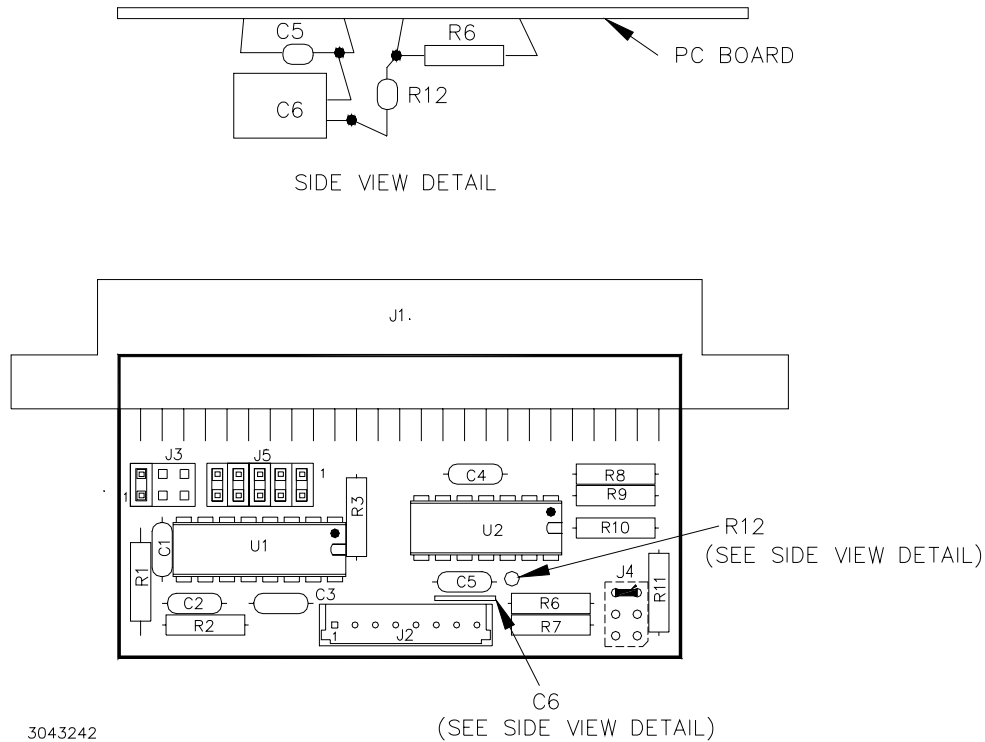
ADAPTER ASSEMBLY A11, COMPONENT LOCATION
